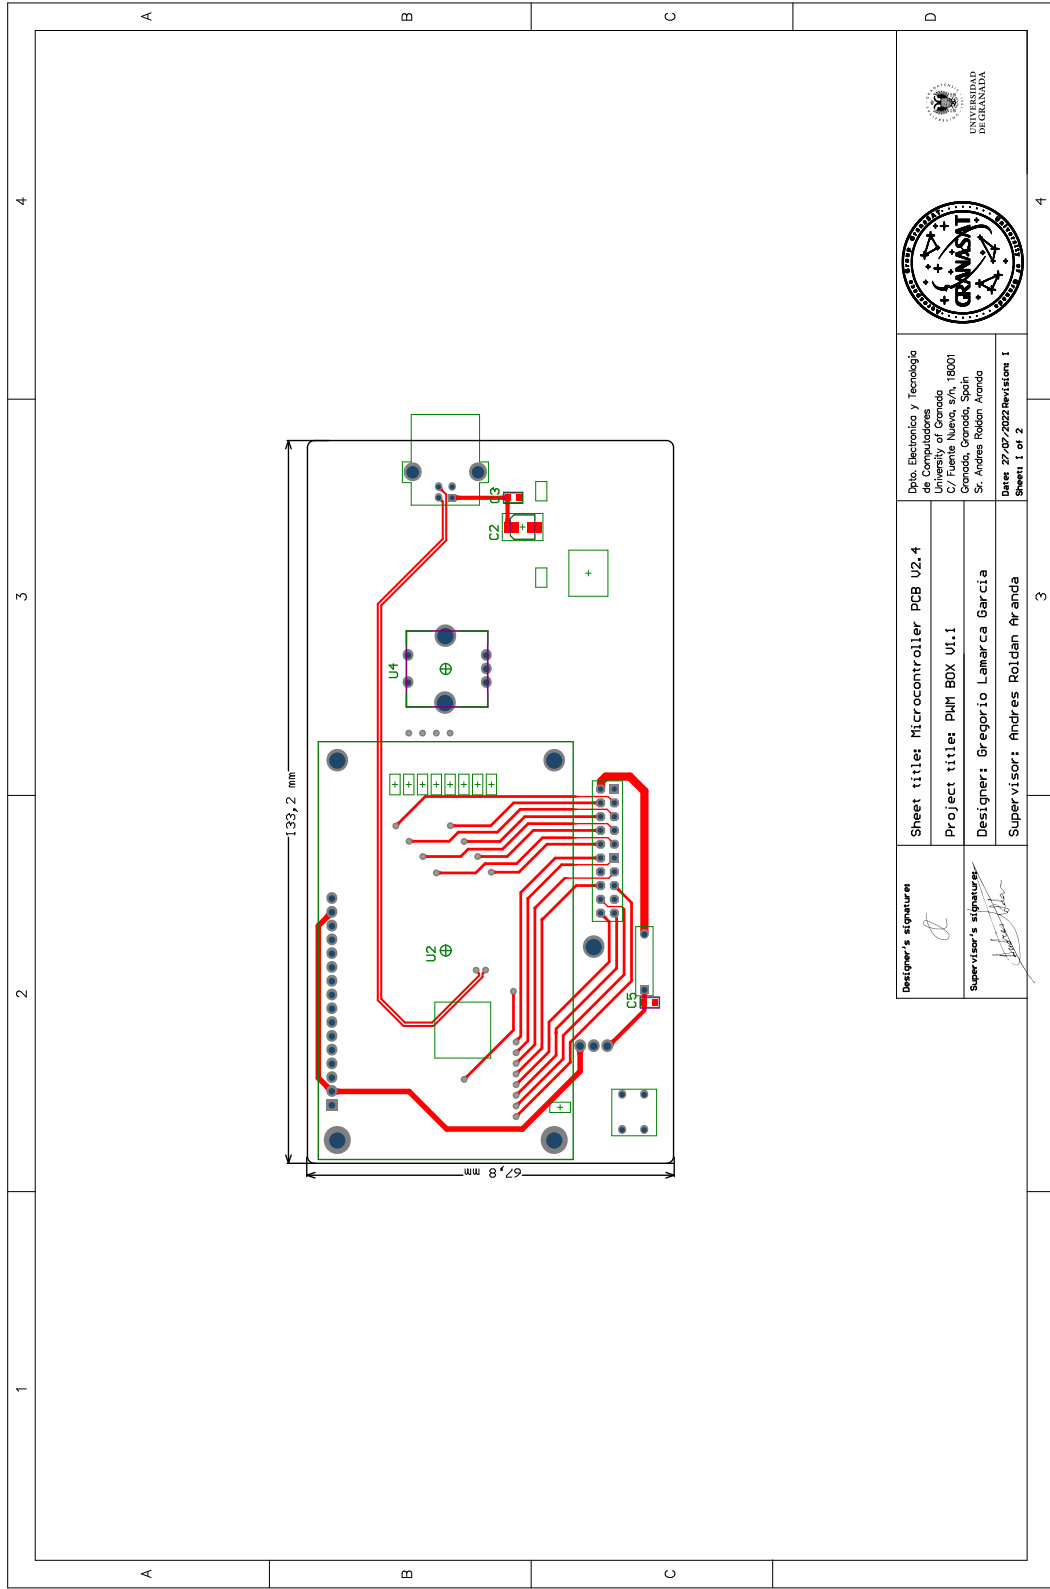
Top PCB prints in Microcontroller PCB project
